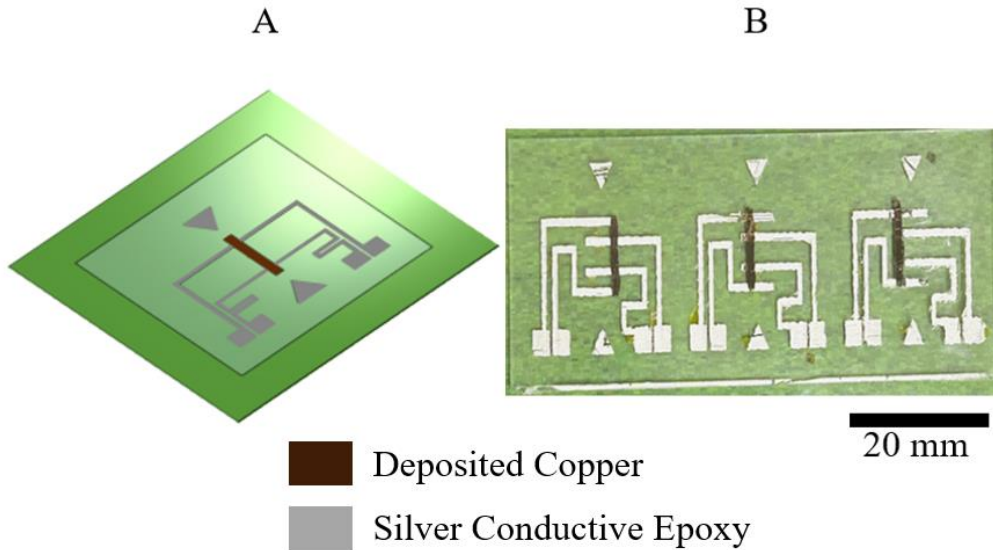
Test structure for ink resistivity measurement using four-point probe (A) CAD design and (B) fabricated test coupon.
